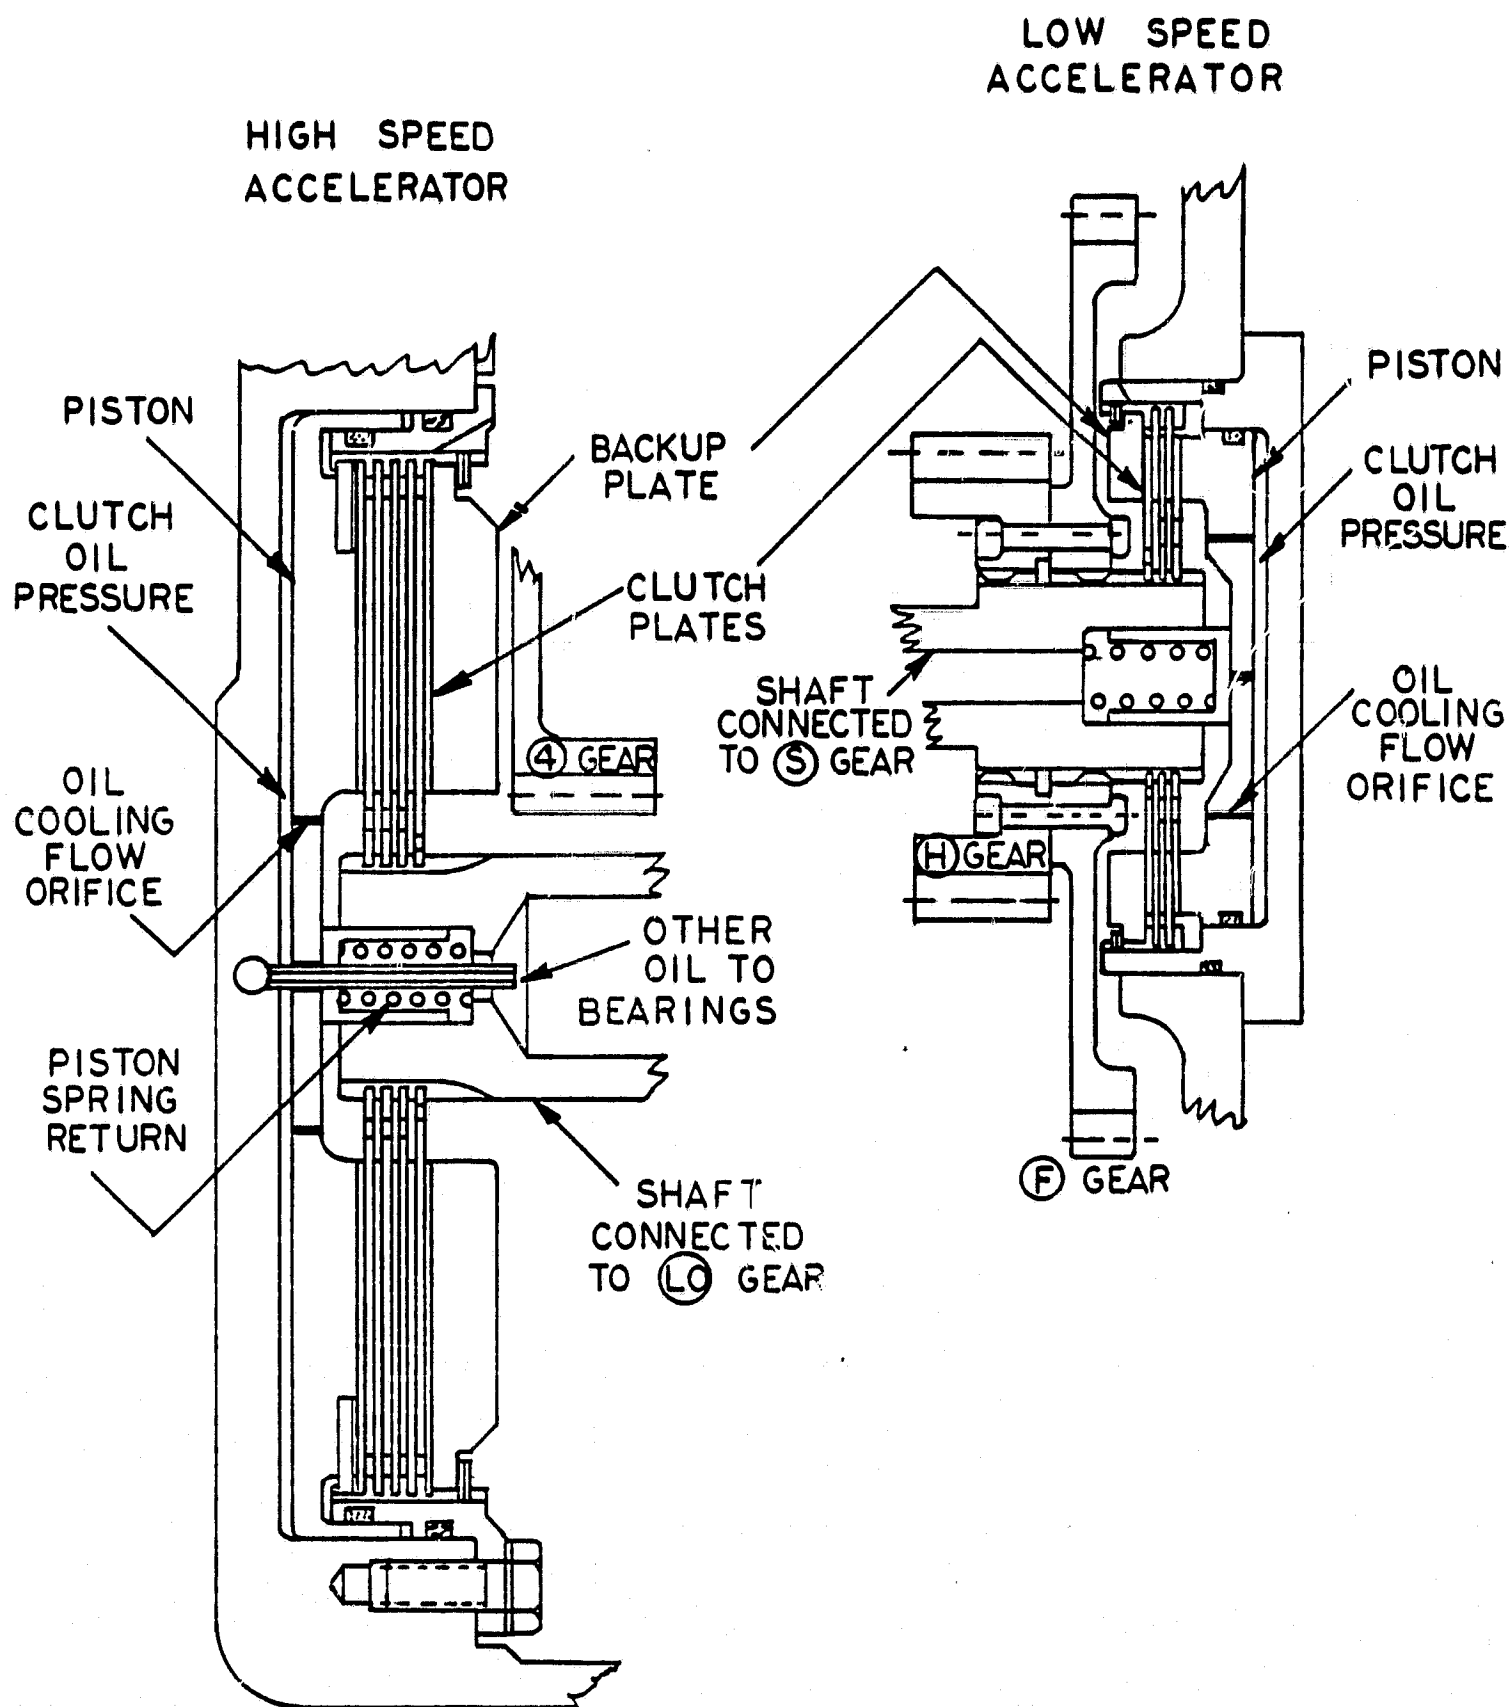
ACCELERATOR CLUTCH DESIGN
